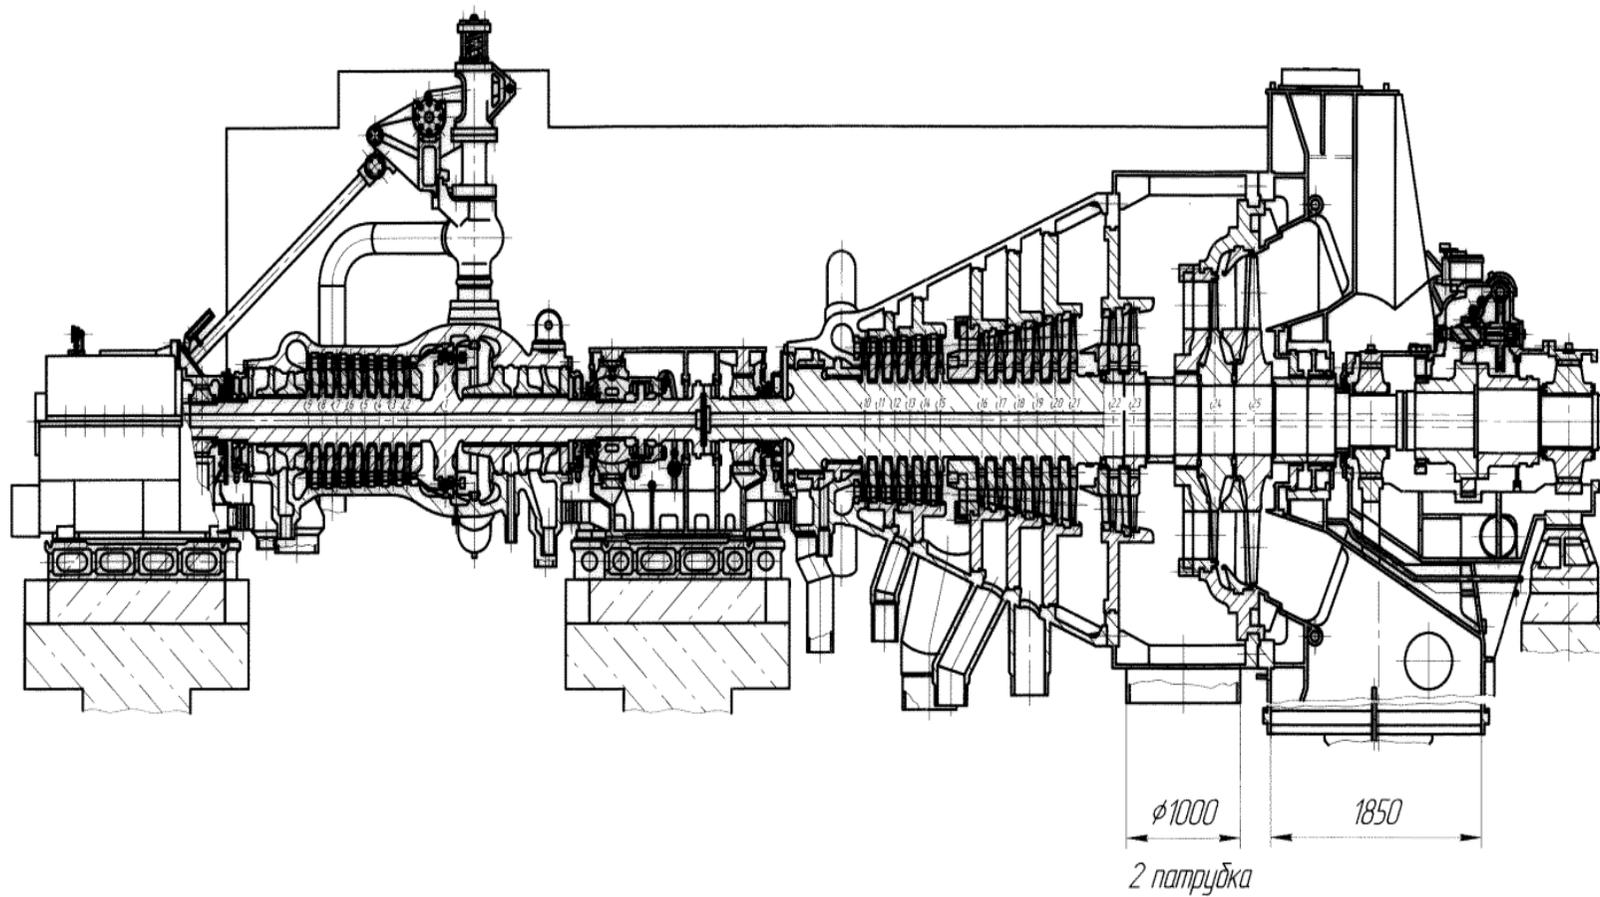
Sectional arrangement drawing of the TP-65 / 75-12.8 UTZ turbine
